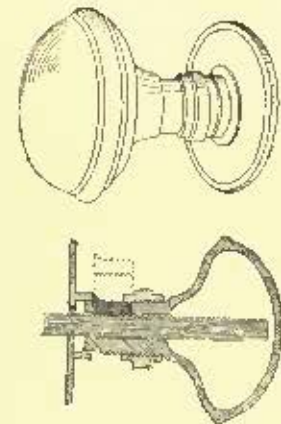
Morris Patent Door-knob. Ireland Mfg. Co.
